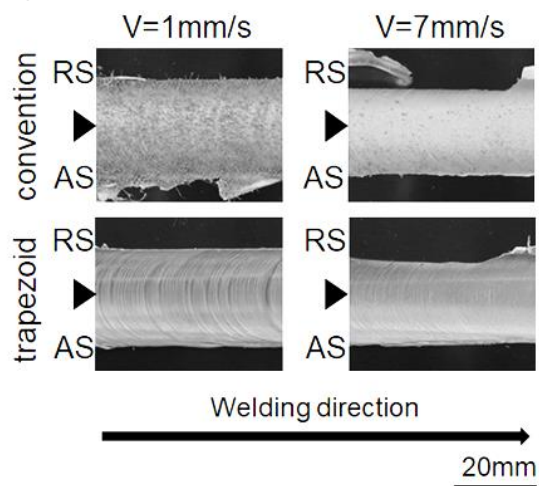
Appearances of welding joint. (The marks are weld interface.)
